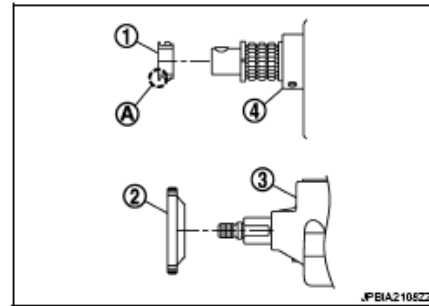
Identifying Oil Pump Sprocket, Oil Pump And Crankshaft
